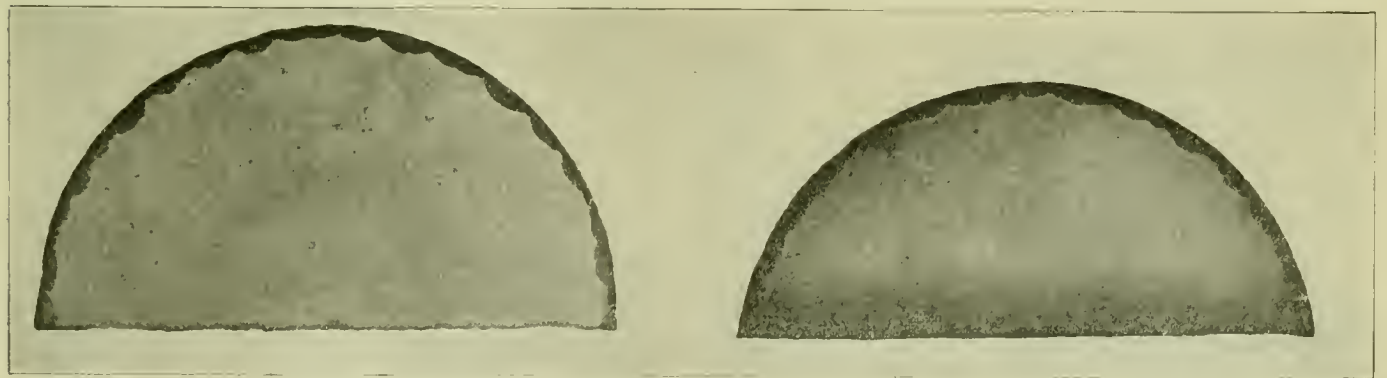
Two Halves of the Face Opposite to That Shown in Fig. 1 After Annealing; (a) Cooled in the Furnace; (b) Cooled in the Air
